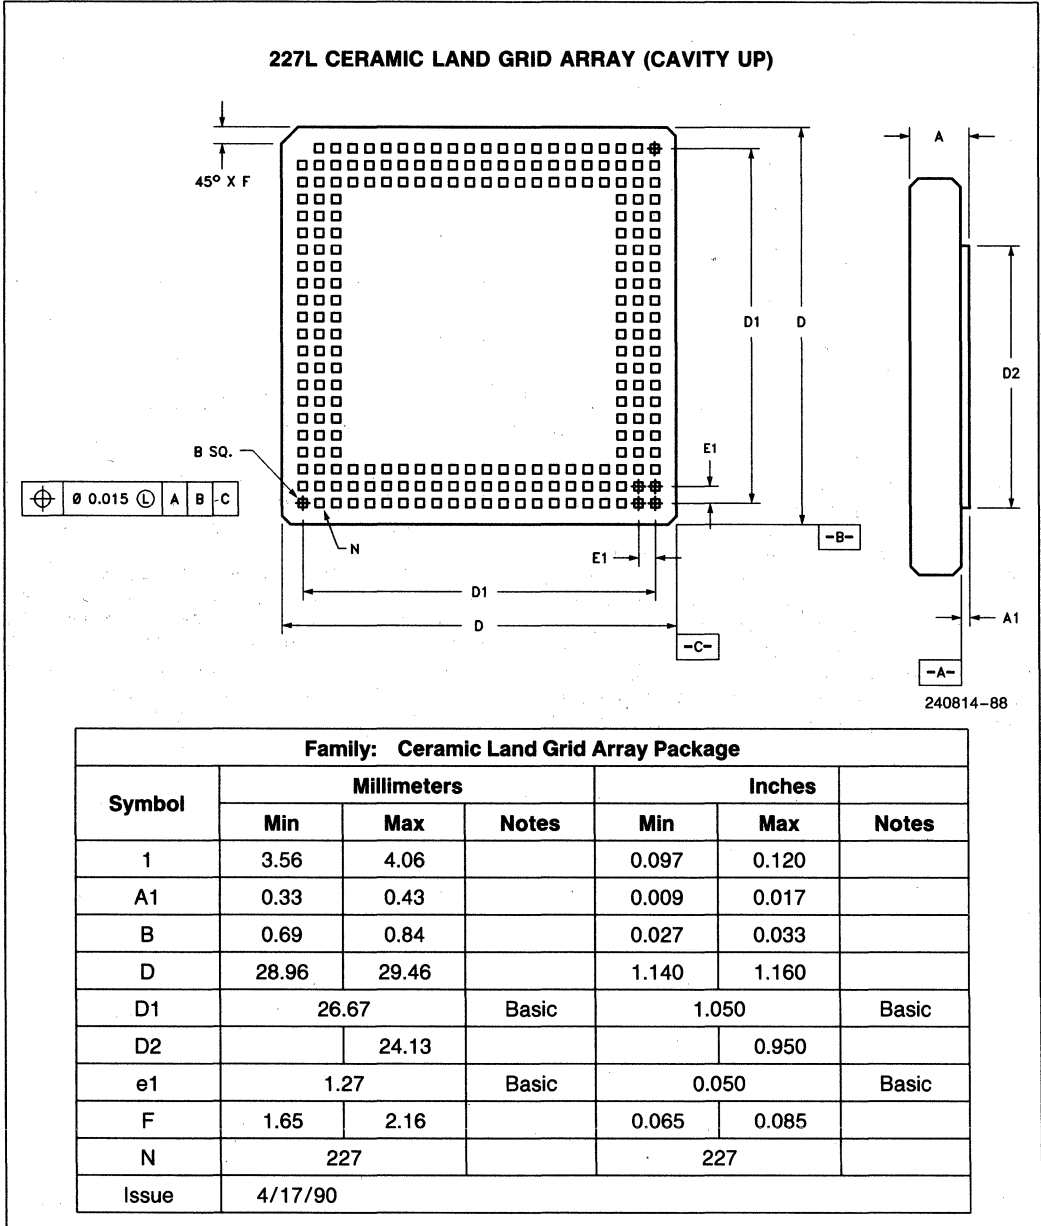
Principal Dimensions of the 386™ SL CPU in a 227-Lead LGA Package
